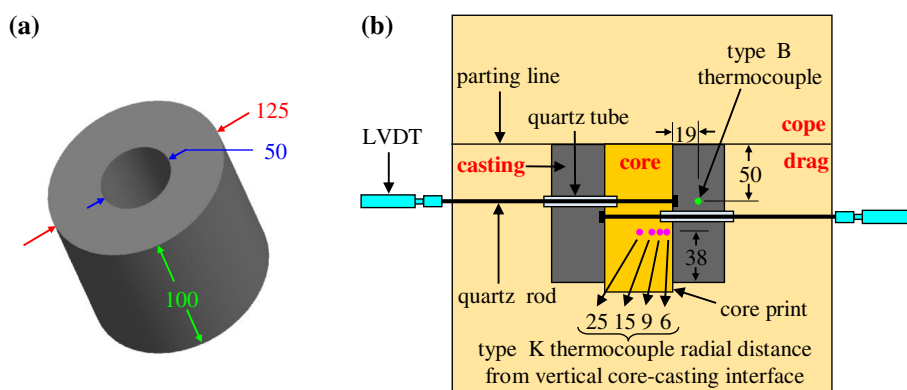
Casting geometry (a) and experimental schematic (b) for the cylinder experiments.
